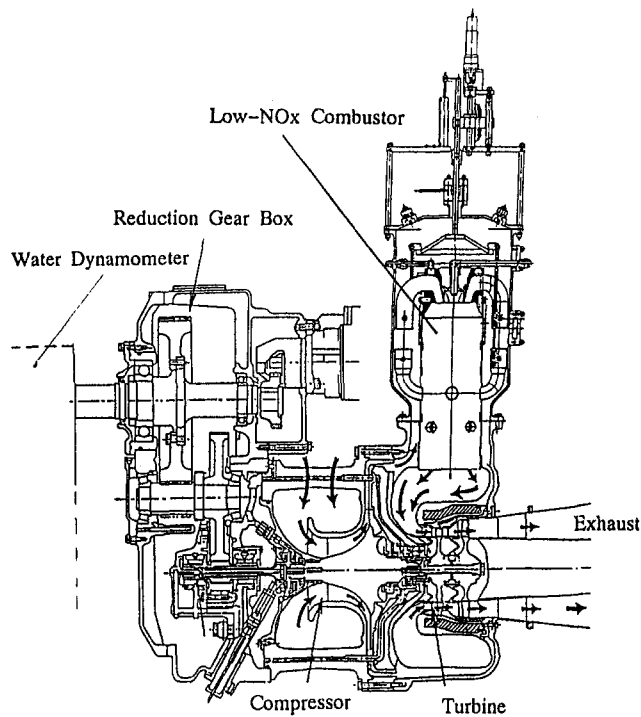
Cross-sectional view of test engine equipped with variable geometry combustor
